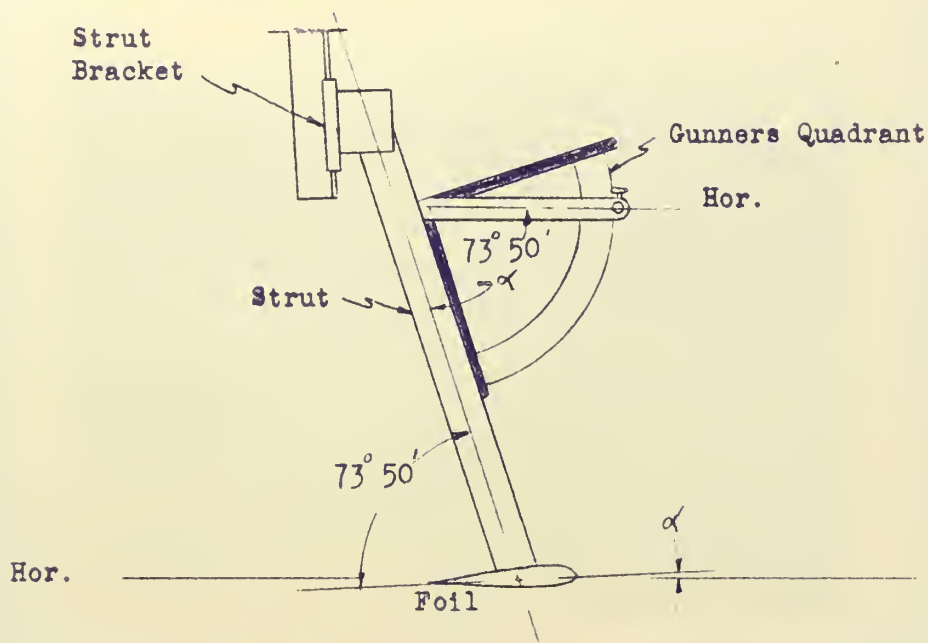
also shows the setting of angle of attack. Easiest method is with one man adjusting the foil angle and the other holding the Gunner's Quadrant. After the angle of attack has been set
